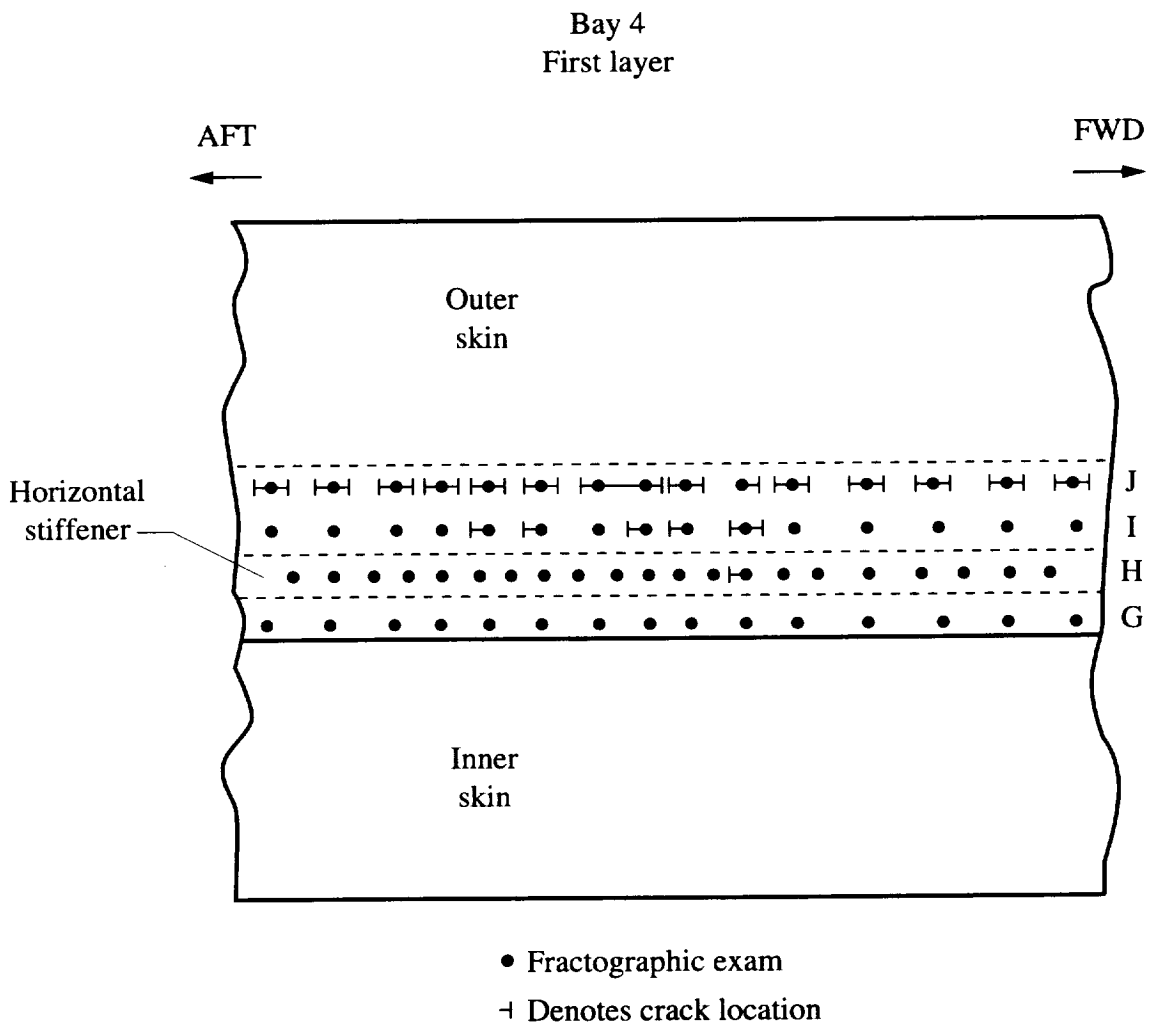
The schematic shows the location of fatigue cracks found in the first layer (outer skin) of the bay 4 lap splice joint by destructive examination.
